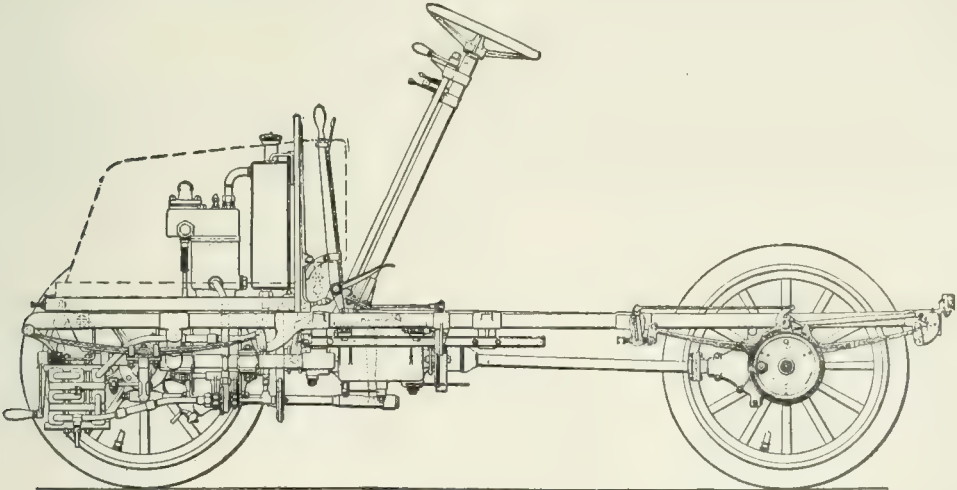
SIDE ELEVATION OF AUTOMOBILE CHASSIS.
